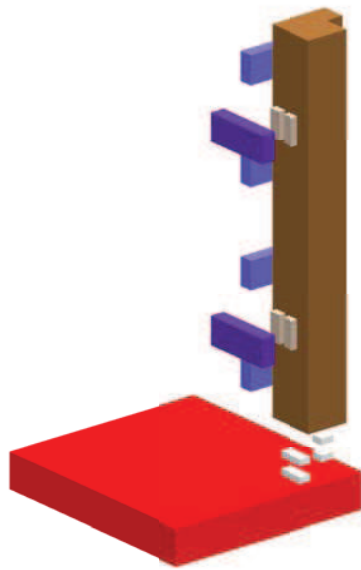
Exploded view of the assembly of the copper component with the tooling and the positioning on the stainless steel support
